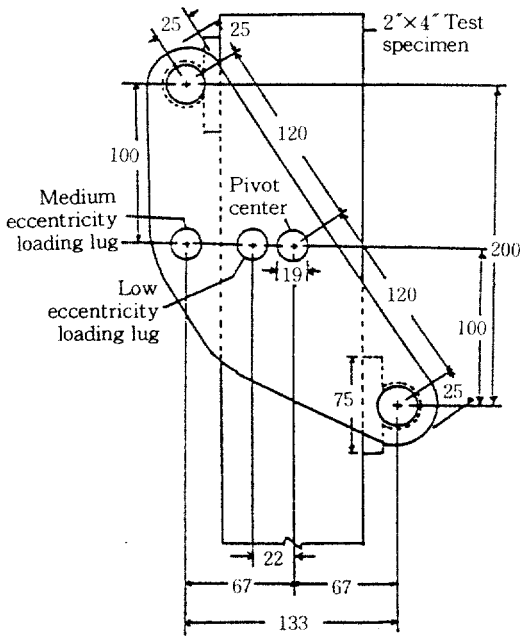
Eccentric loading apparatus improved by authors(unit: mm).
